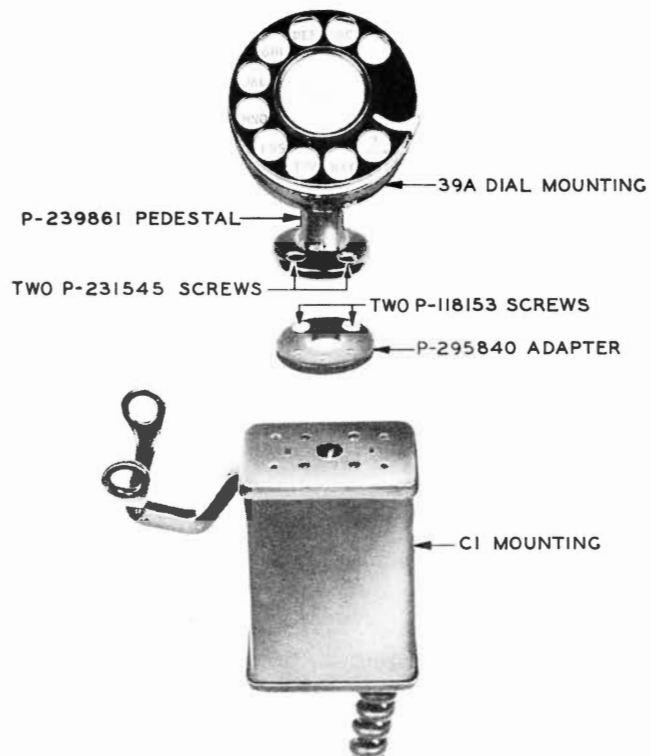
39A Dial Mounting with C1 Handset Mounting
